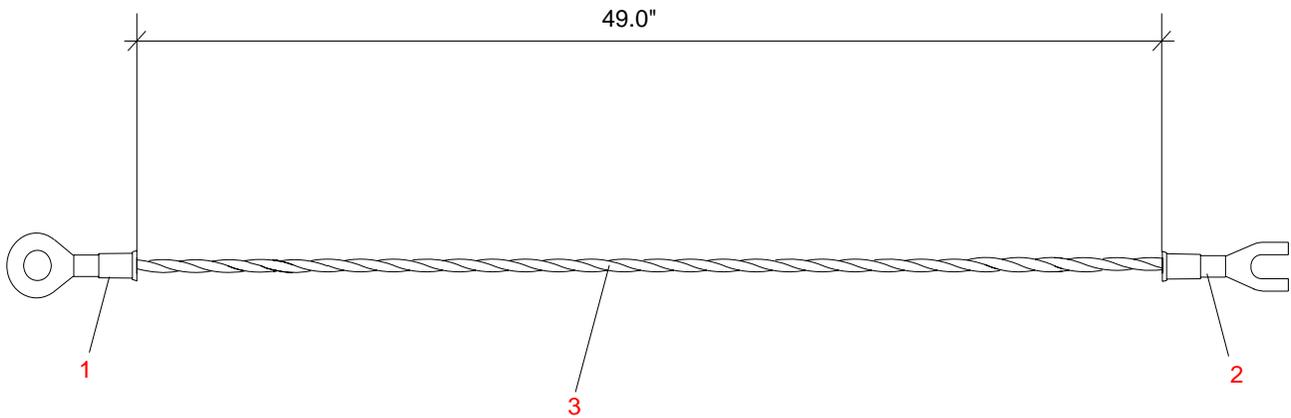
Positive Wire - Driver Board Tilt Motor Side Cable Assembly
